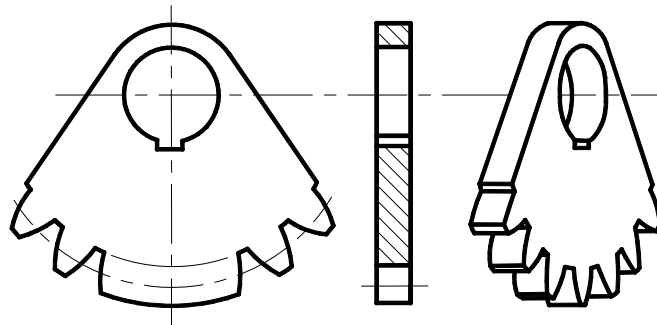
Drawing rack circle on view, in section and in axonometric view
